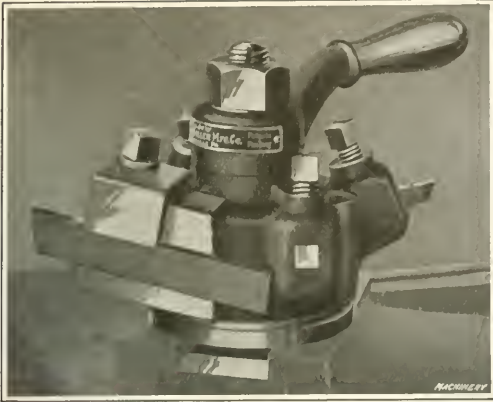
Close View of Style C Turret Tool-holder with Cut-off Tool at Front
